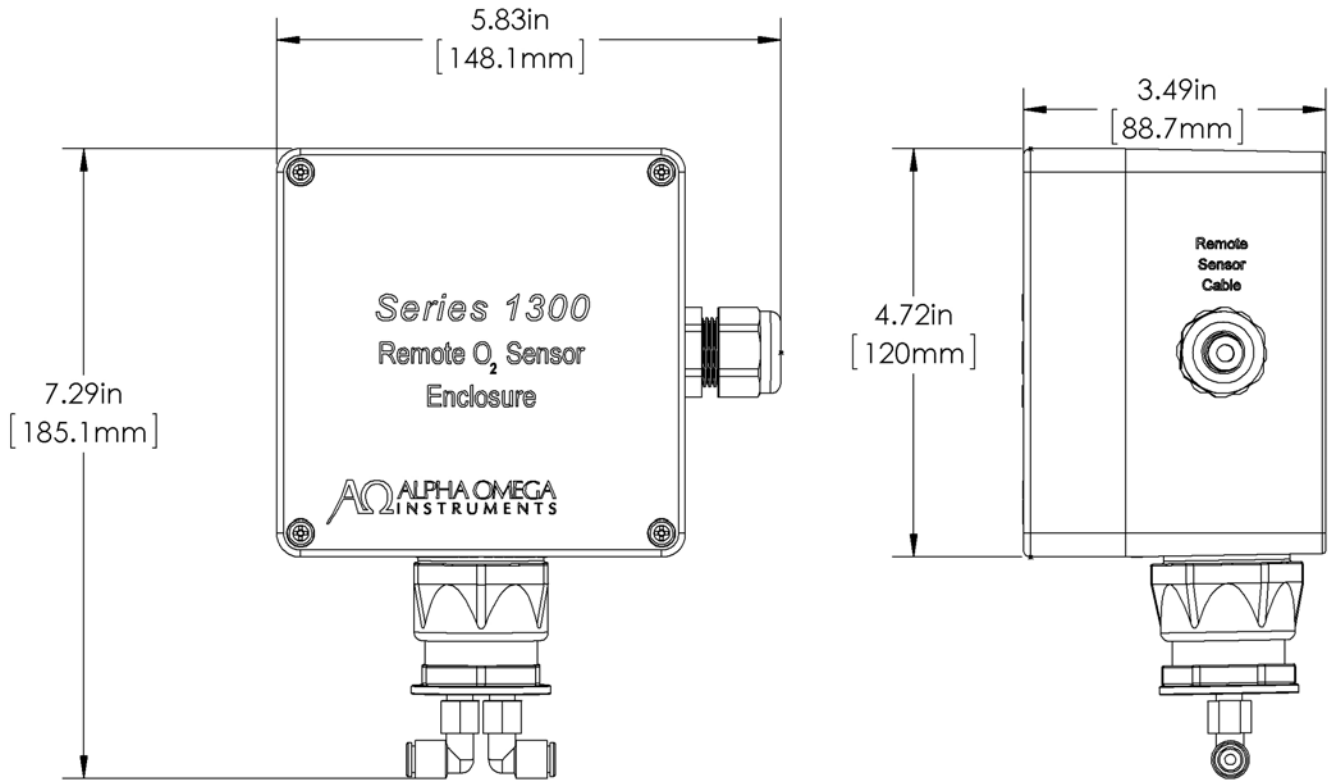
Remote Oxygen Sensor Enclosure & Optional Calibration Fixture
